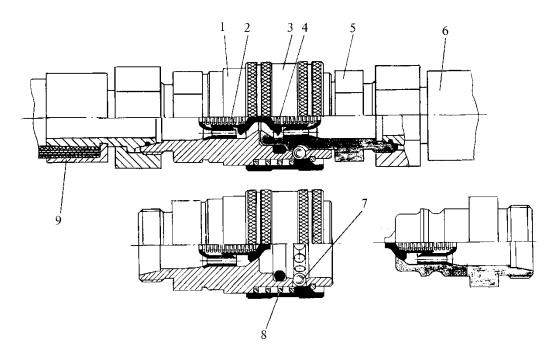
Diagram of operation of quick-lock cutoff devices 1 – couplings, 2, 4, 8 – springs; 3 – closing sleeve; 5 – valve; 6, 9 – hoses; 7 – balls
